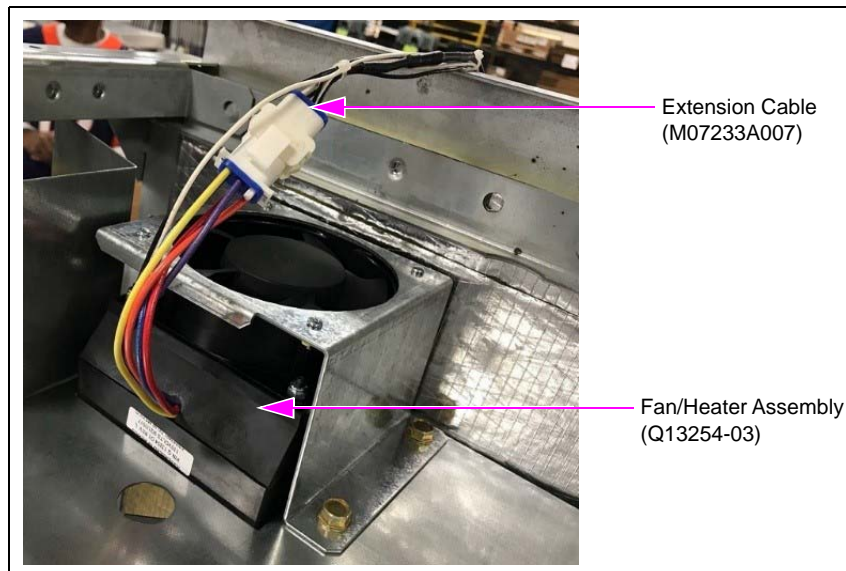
Connecting Fan/Heater Assembly (Q13254-05) in Encore DEF Units
